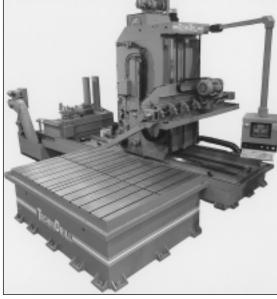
Shown is a 3-axis CNC drilling Machine (Courtesy: TechniDrill Systems, Inc.)
